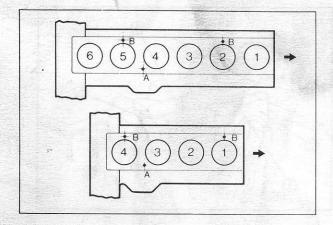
Cylinder Head/Gasket Locating Dowels
